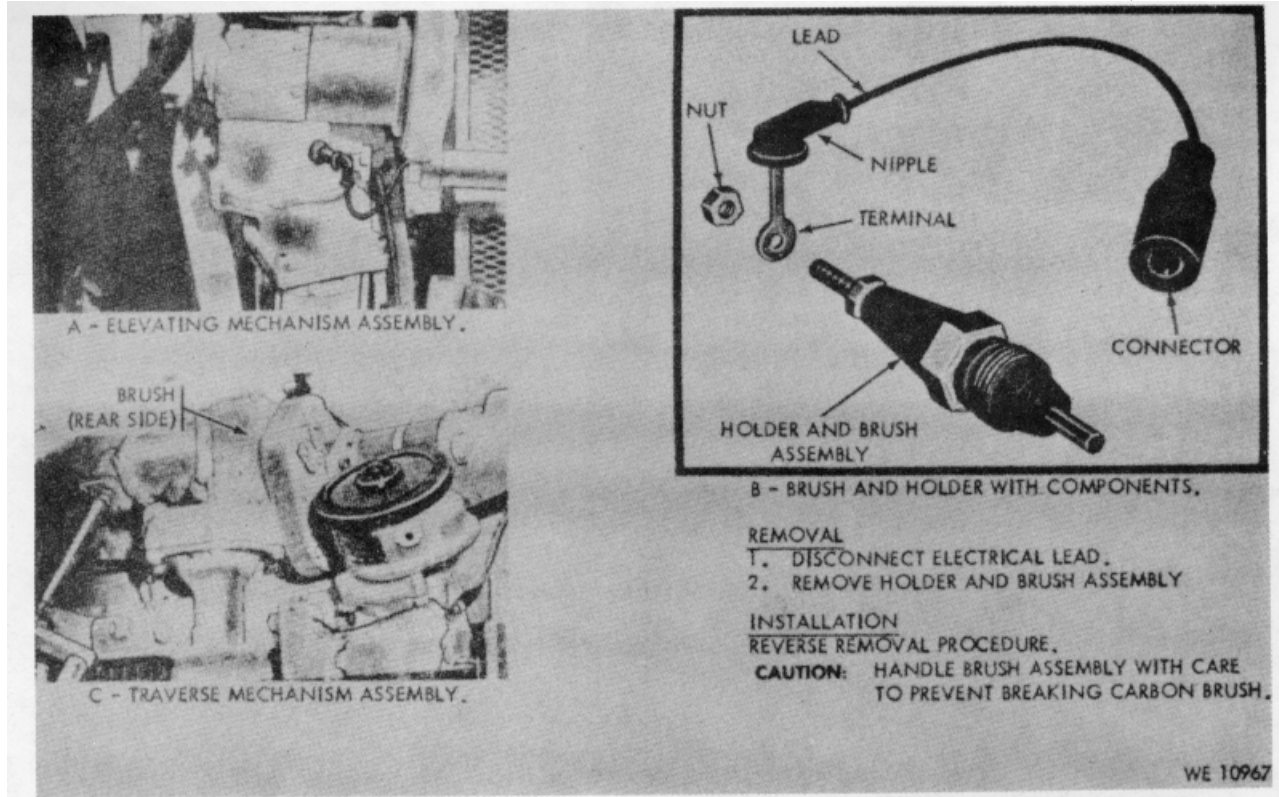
Removal/installation - elevating and traverse mechanism clutch brush
